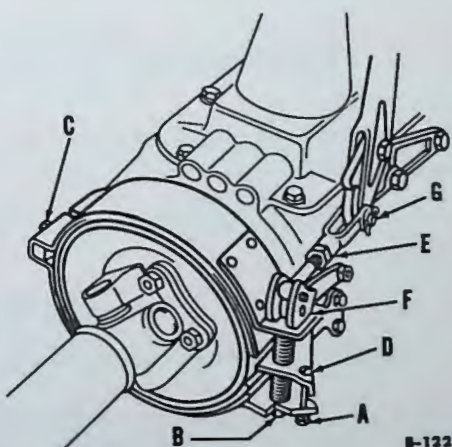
1940-1946 Truck Hand Brake (Propeller Shaft Type)
